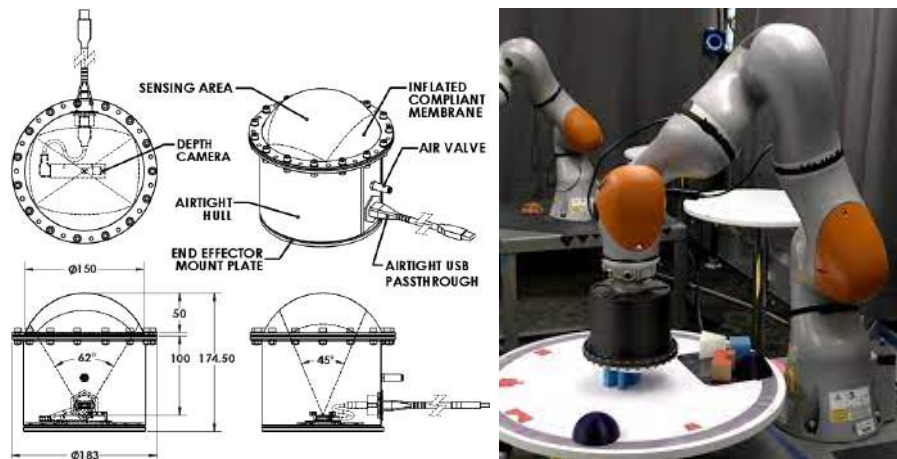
On the left the dimensioned (mm units) sensor assembly; on the right the soft-bubble mounted on a KUKA iiwa robot.
